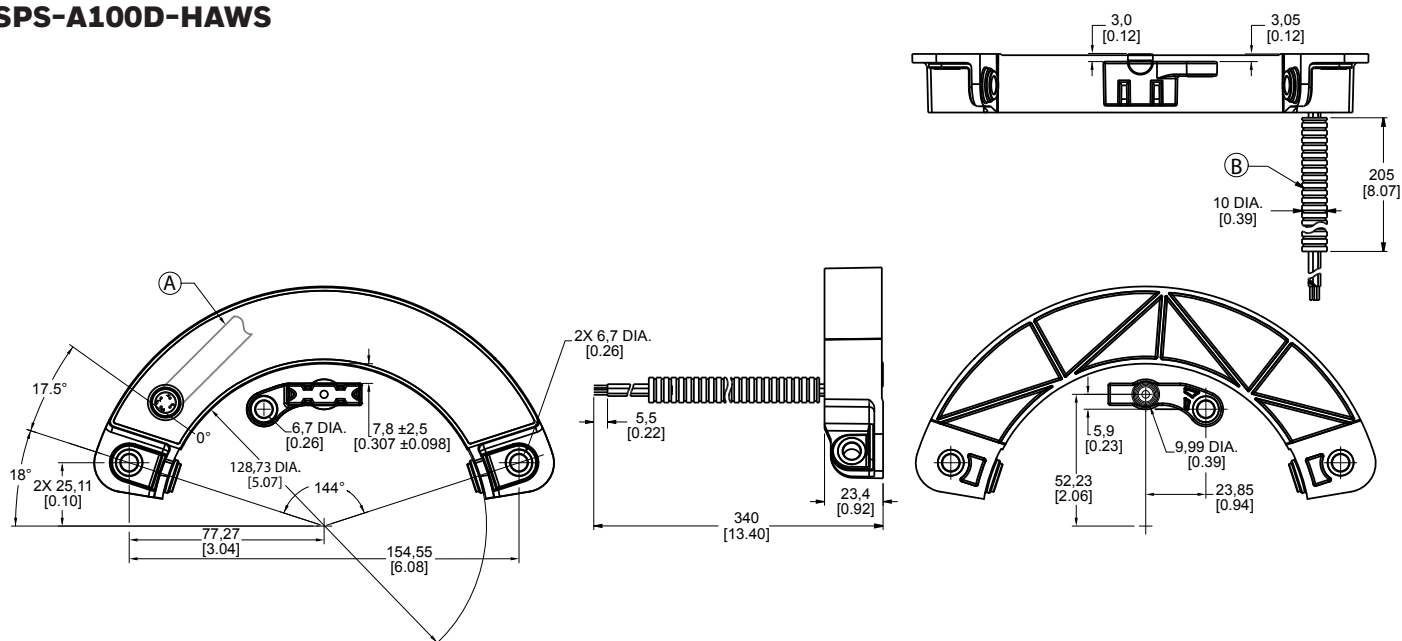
Dimensional Drawings (For reference only: mm/[in.])
